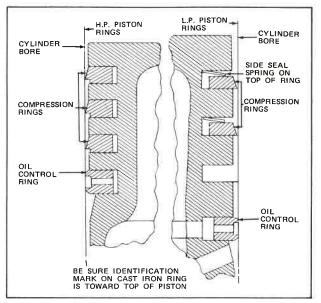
PROPER PISTON RING ARRANGEMENT.
